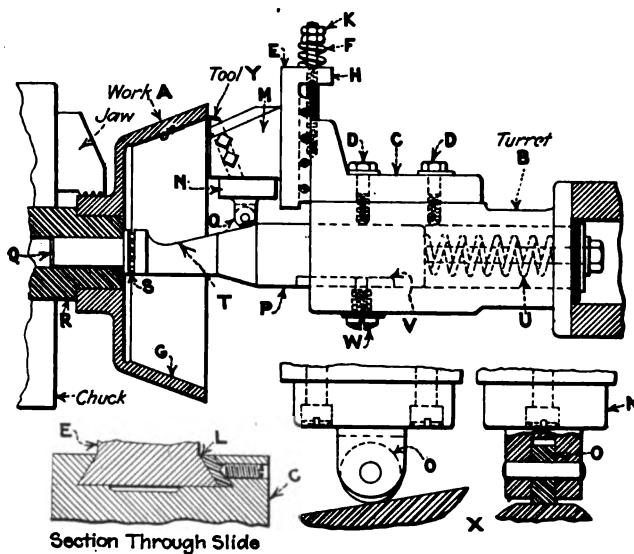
GENERATING TOOL FOR BORING TAPER HOLE
